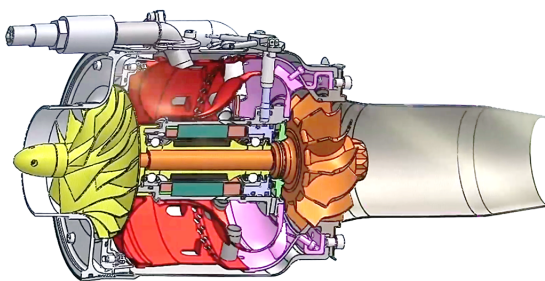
Cutaway of turbojet engine manufactured by TDI inc.⁽²⁰⁾
